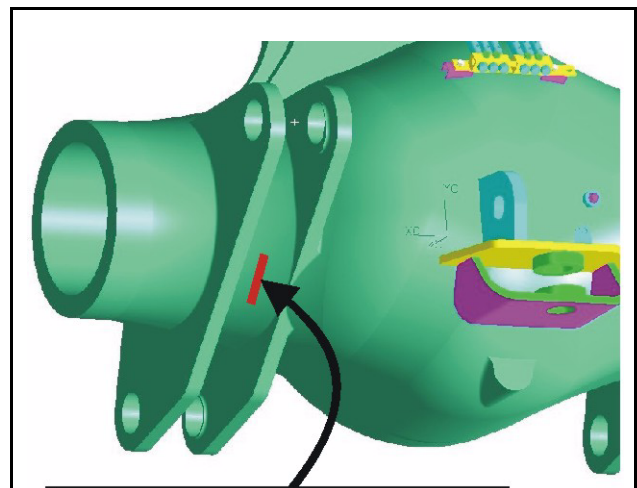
illustrates the typical failure location in the axle housing. If cracks exist, gouge out defects and weld repair as described in Parts & Service News AA02175A.
